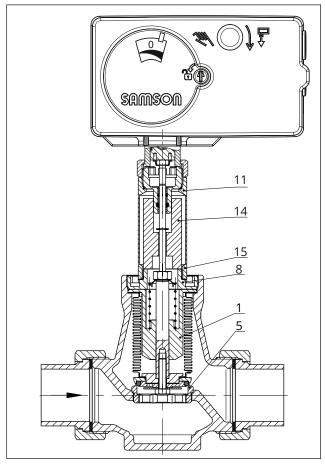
Type 3222/5827 · Type 3222/5724-3 · Type 3222/5724-8 Versions for water above 150 °C and steam
